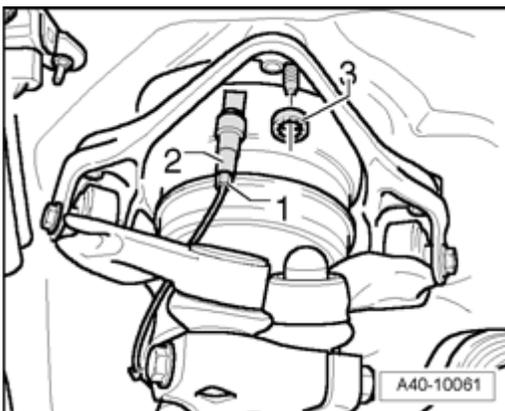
Identifying Residual Pressure Valve And Connecting Piece
